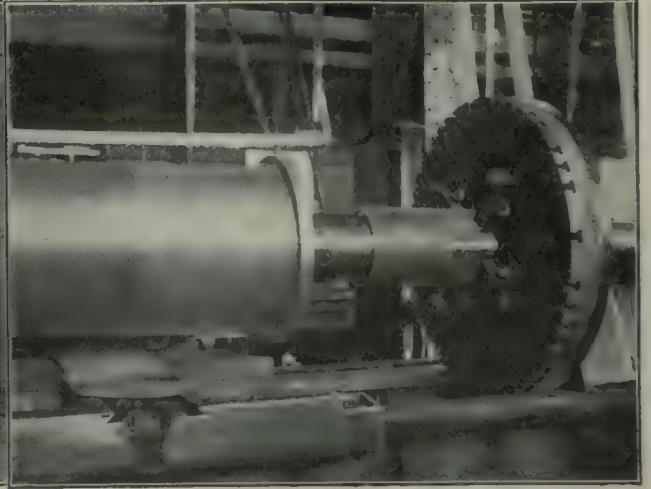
METHOD OF DRIVING ROLL IN LATHE
